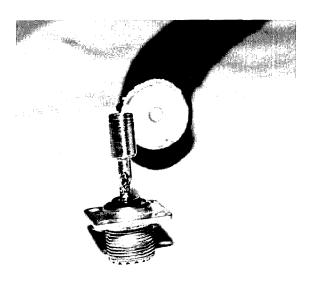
The inner assembly has been completed and prepared for insertion into the outer adapter.
